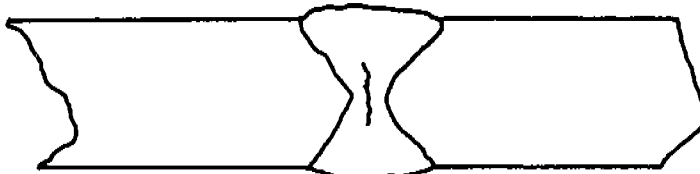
Crack in both root passes of a double-vee butt joint welded with E6020 Electrode. Subsequent passes welded with E6010 Electrode.
